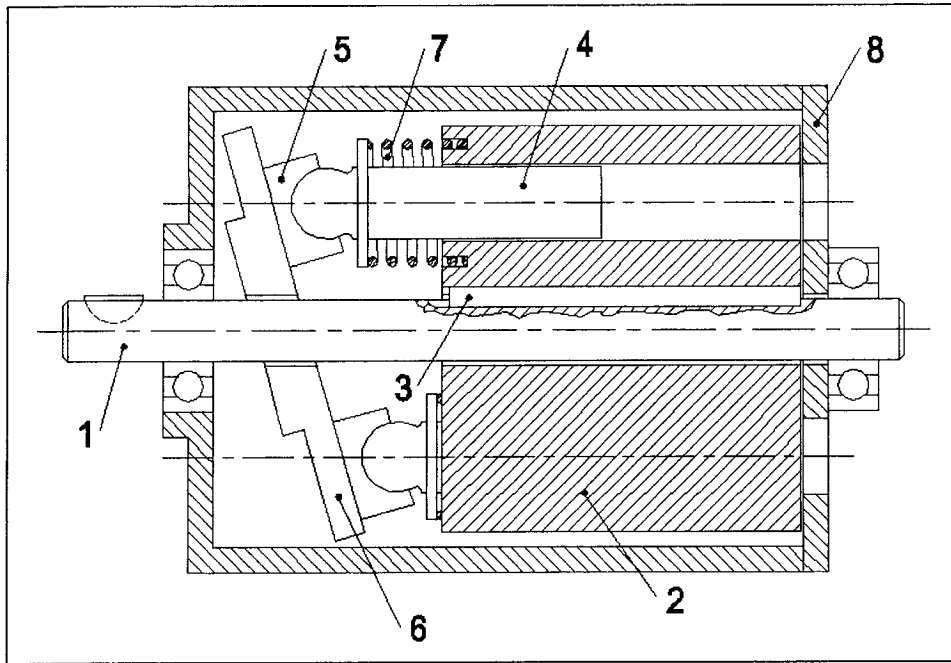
ACMP package – Variable displacement axial piston pump
